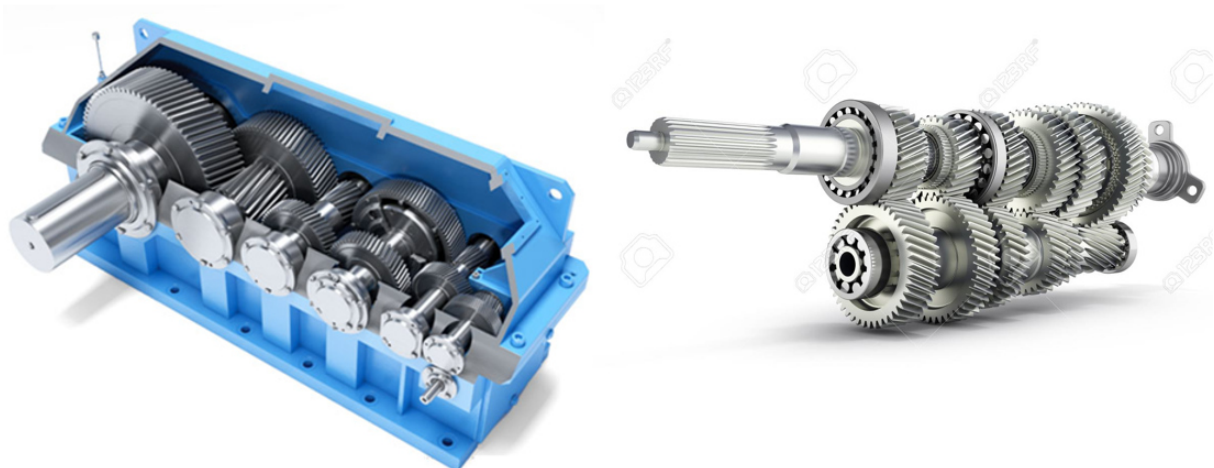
Typical appearance of the industrial (left) and automotive (right) gearbox. [1], [2].
